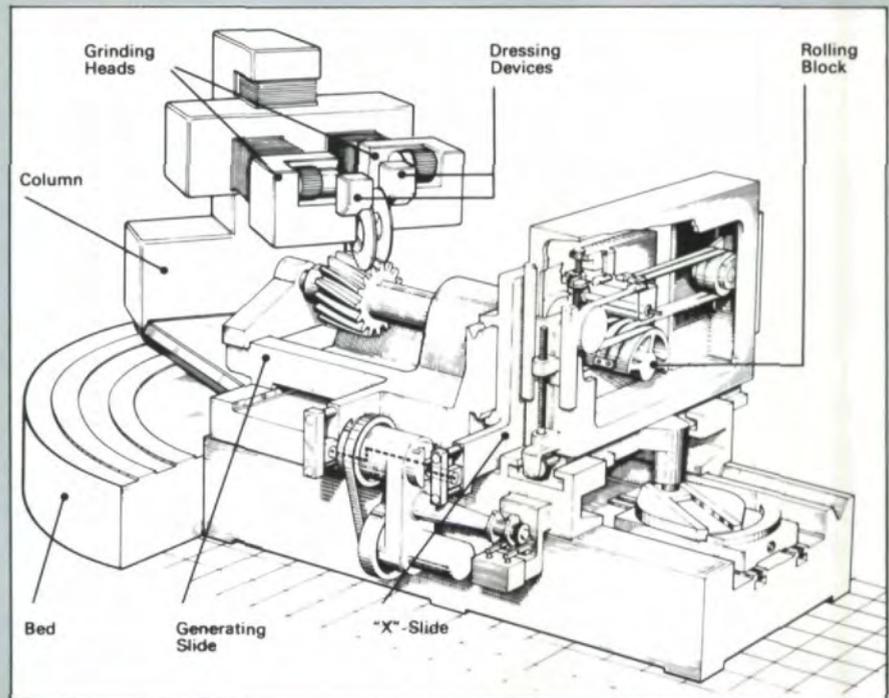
(Right) Kinematics of saucer-shaped wheel gear grinding machine.
